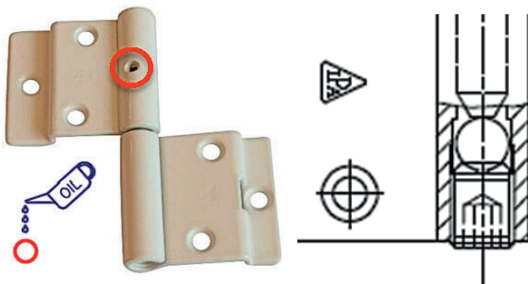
, a Lubricating a butt hinge and adjusting to height
